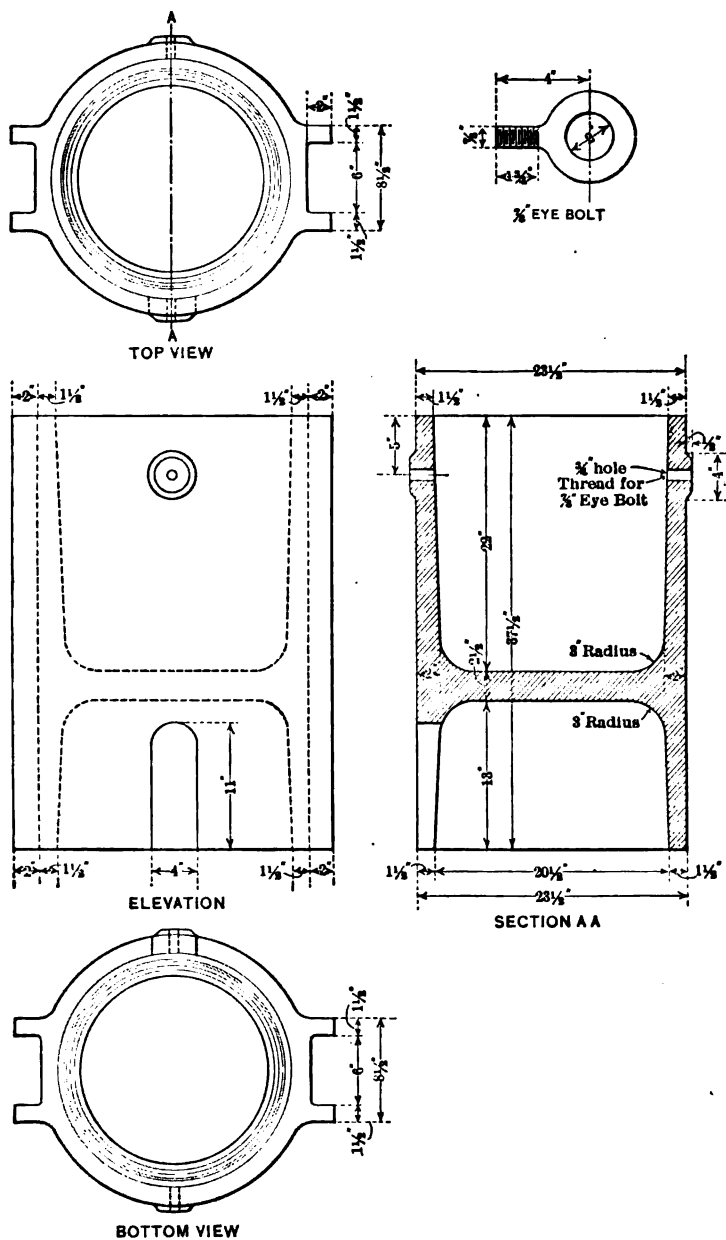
CASTING FOR CONCRETE PILE CAP.
